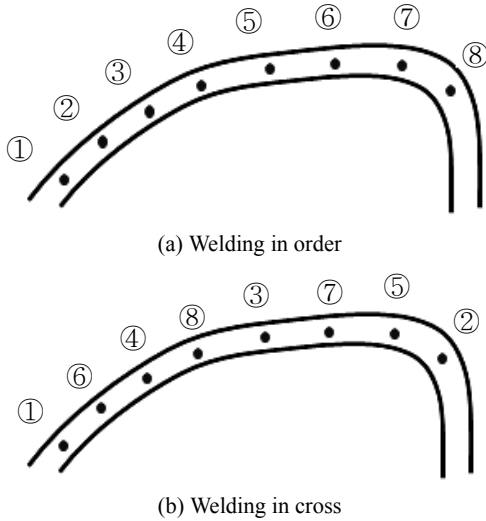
Changing welding order to reduce mismatched edge in flange
